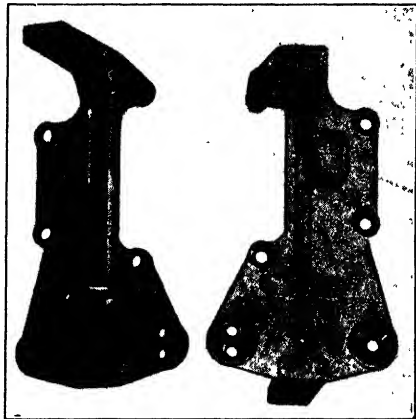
Two views of a casting showing rib and shadow bead.
